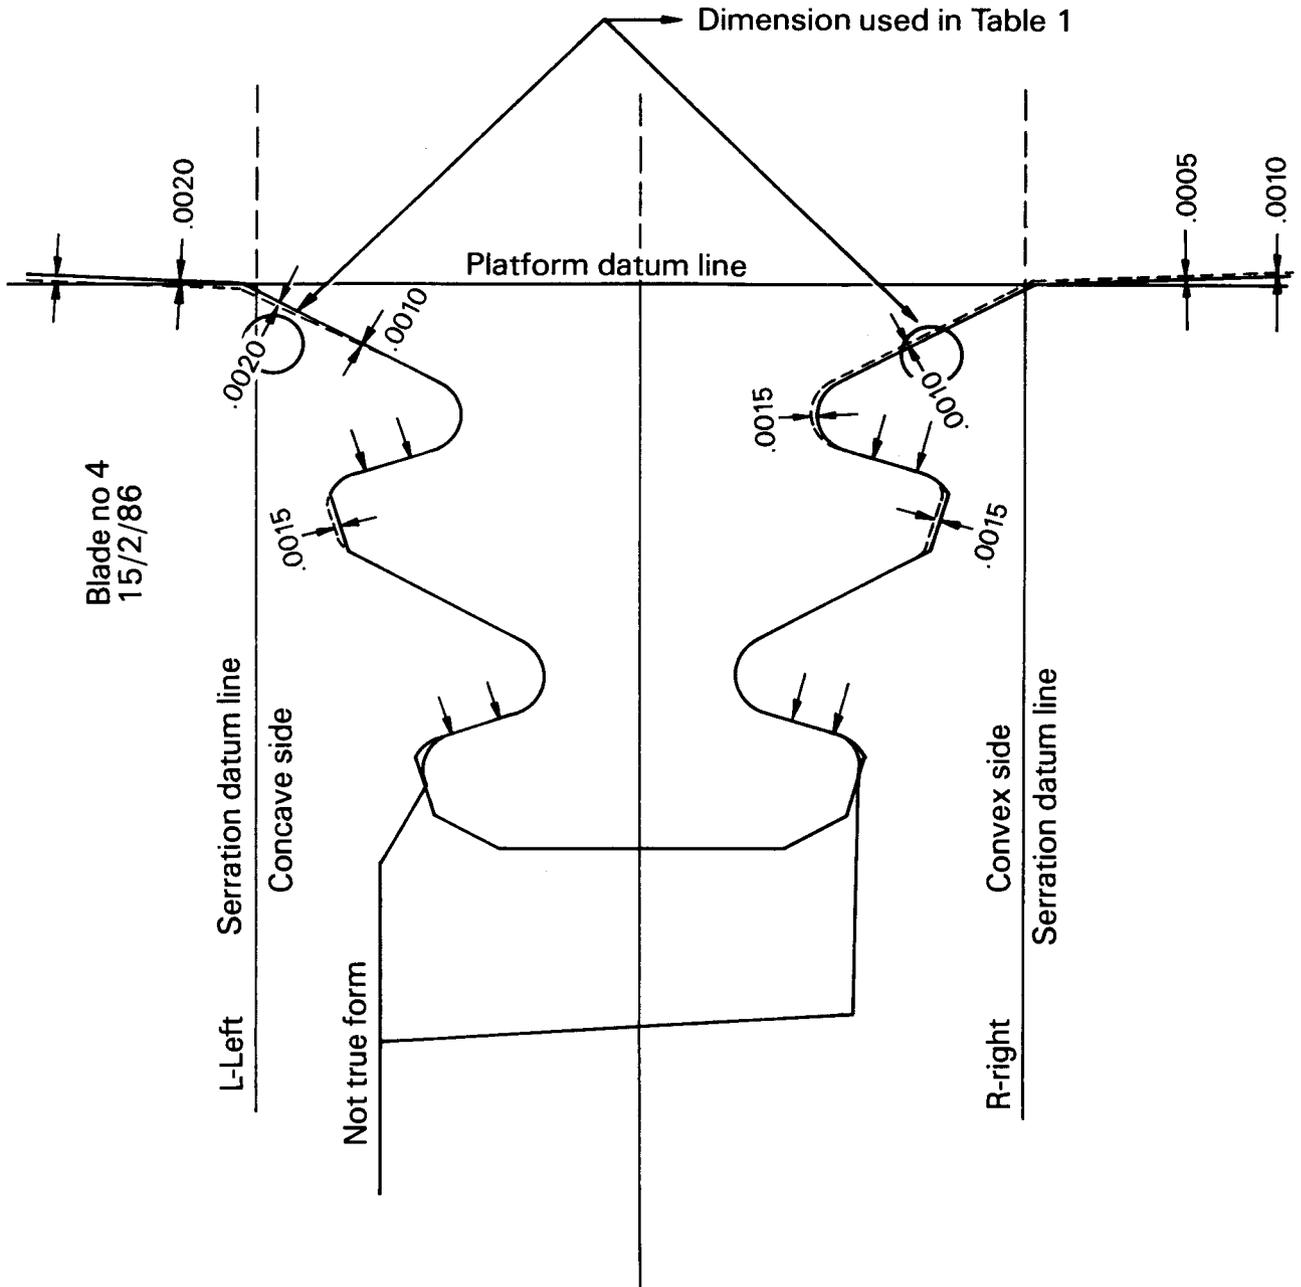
EXAMPLE OF BLADE PROFILE DIMENSIONAL CHECK
